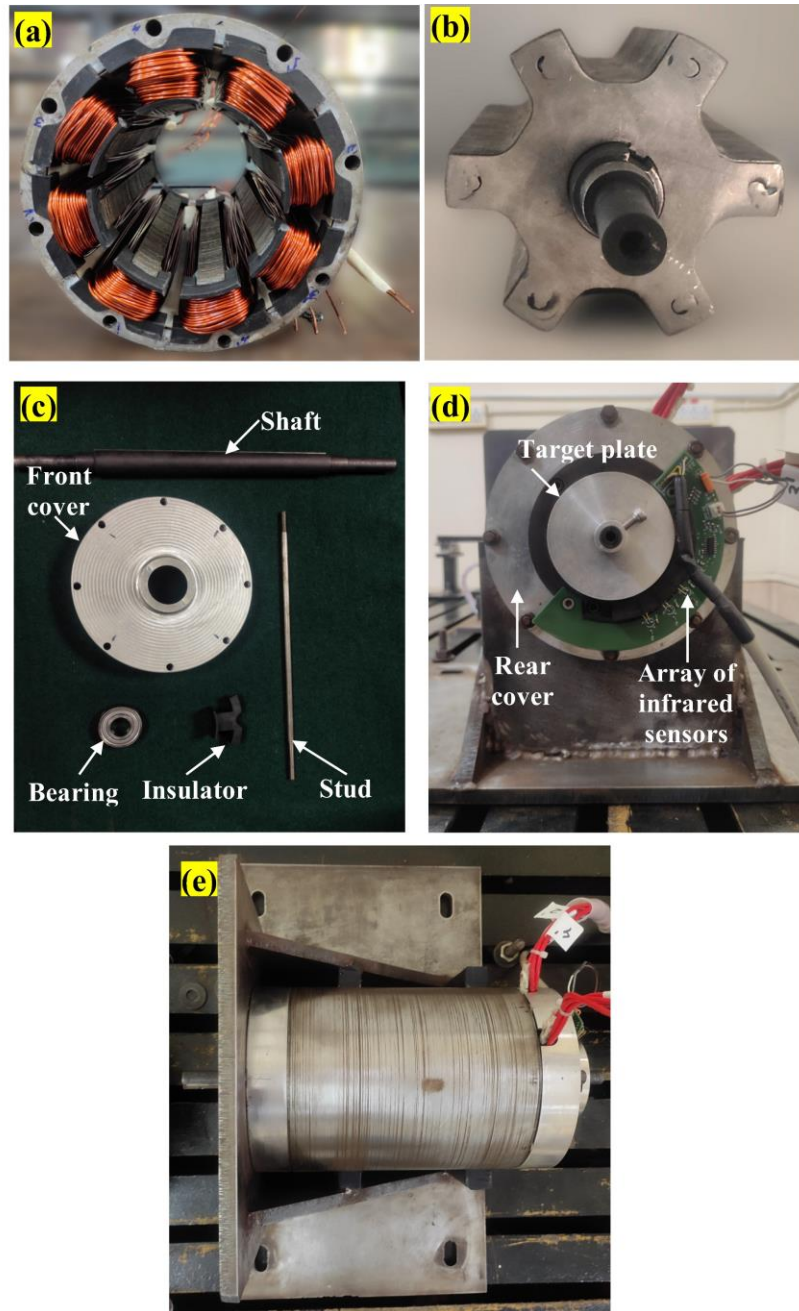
(a) Stator core with the phase windings (b) Rotor assembly (c) Basic components of the motor assembly (d) IR sensor array with target plate (e) Prototype SRM mounted on the fixture (top view)
